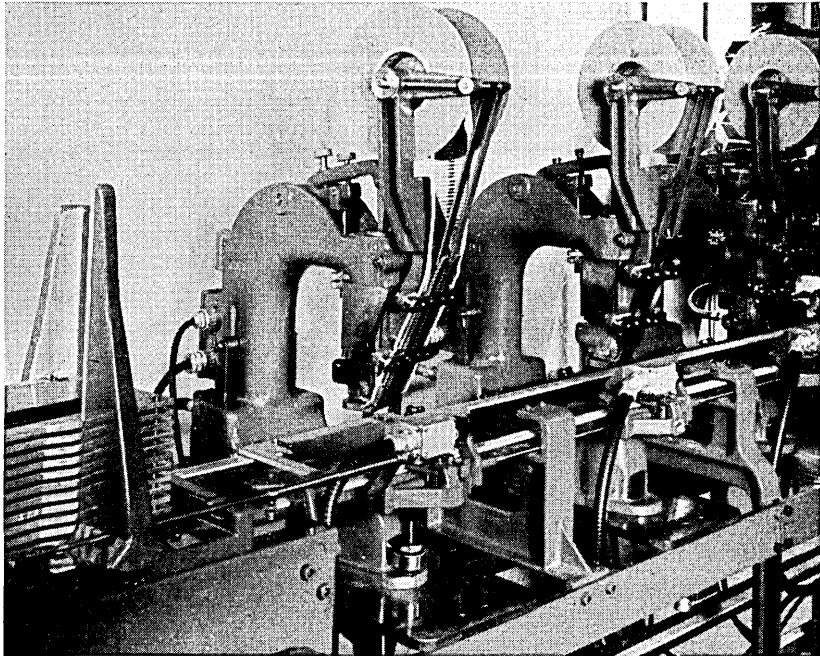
Close-up view of pallet feed and attaching head inserting $\frac{1}{2}$ -watt resistors from a belt
